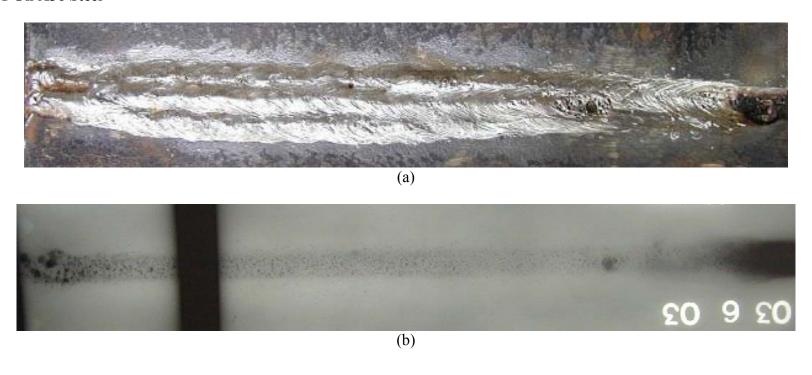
(a) V-groove wet weld deposited with E6013 electrode type on A36 steel at 50 m and (b) its radiographic image.
